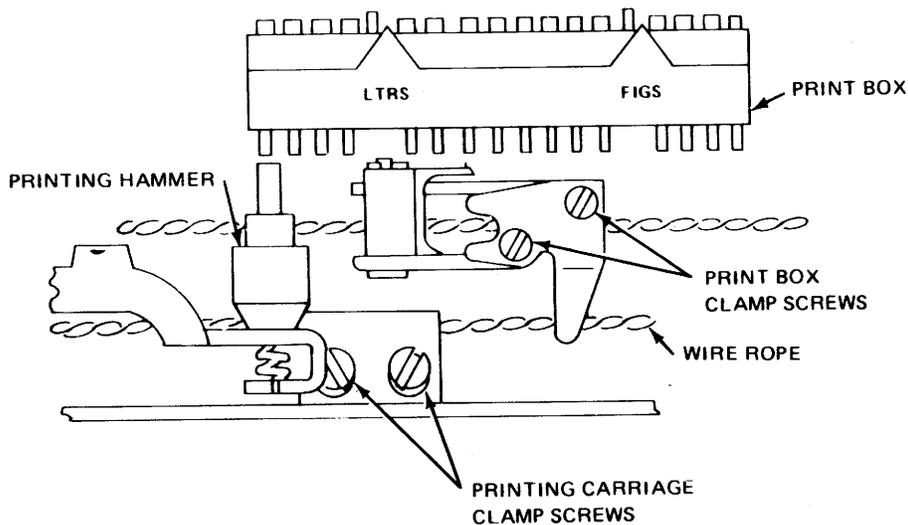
Printing Carriage and Print Box Clamps (Top View).
